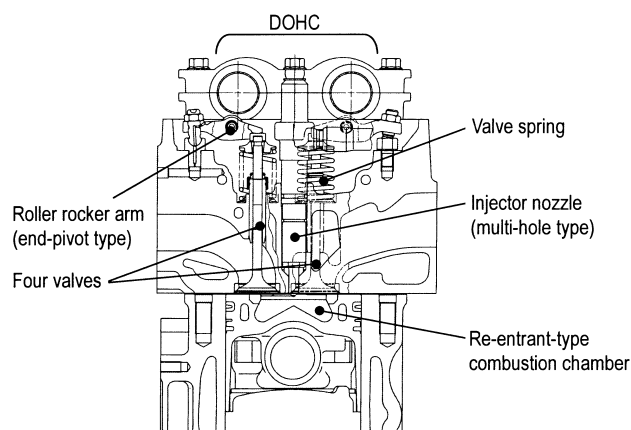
Configuration of valve mechanism and shape of combustion chamber
